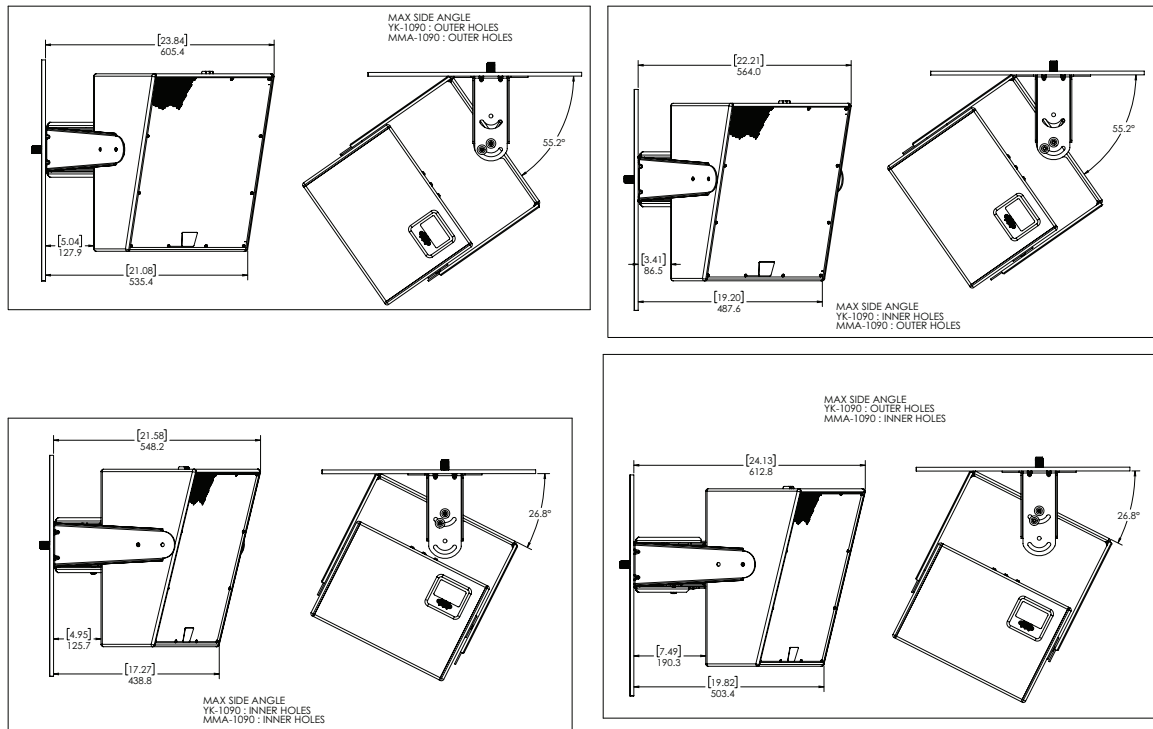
CS1090 YK-1090 and MMA-1090 Extended Positions with Maximum Side Angles [Inches] Millimeters
